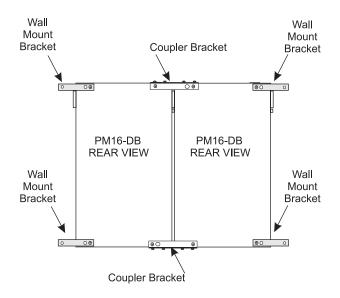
Coupling and Surface Mounting Two PM16-DB Port Modules
